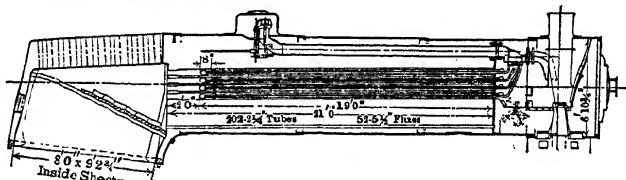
Locomotive Boiler Arrangement for Superheater Test
